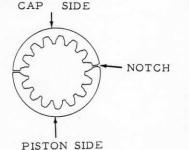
The connecting rod bearing cage used on most models. Retainer half containing seven rollers should be in connecting rod (toward piston). Rod cap is positioned over other side.
